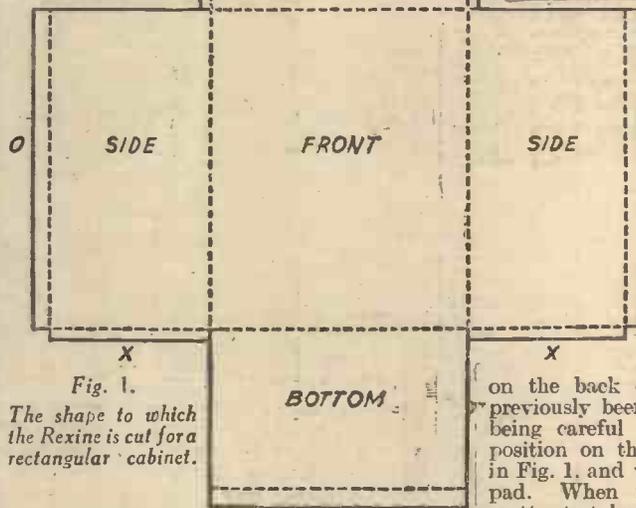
The shape to which the Rexine is cut for a rectangular cabinet.
